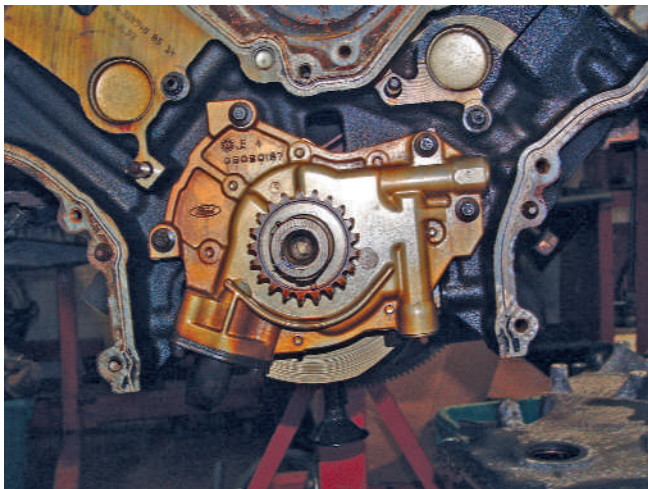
On most engines, the oil pump is driven by the crankshaft at the front of the engine.
